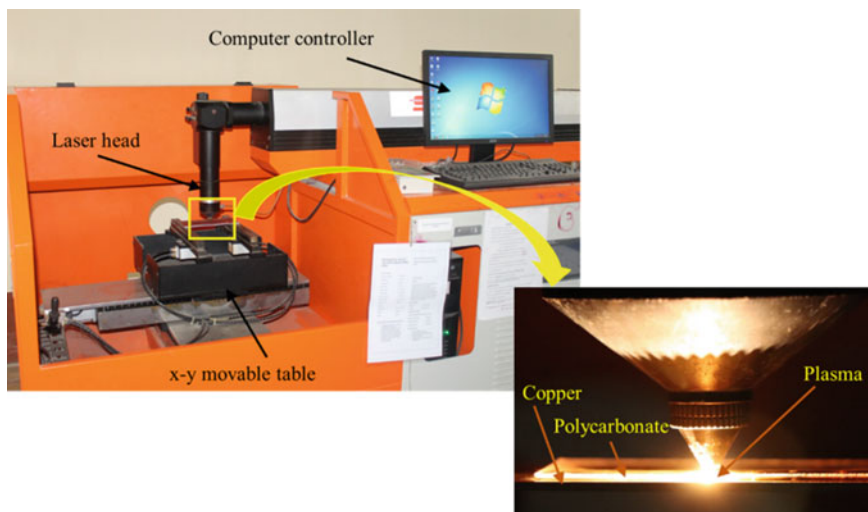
Nd: YAG laser machine set-up for LIPAA process
